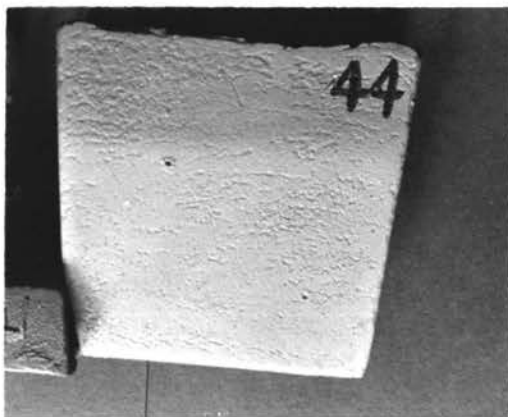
Photographs of surfaces of castings poured in molds containing silica sand and +150 mesh magnetite.
